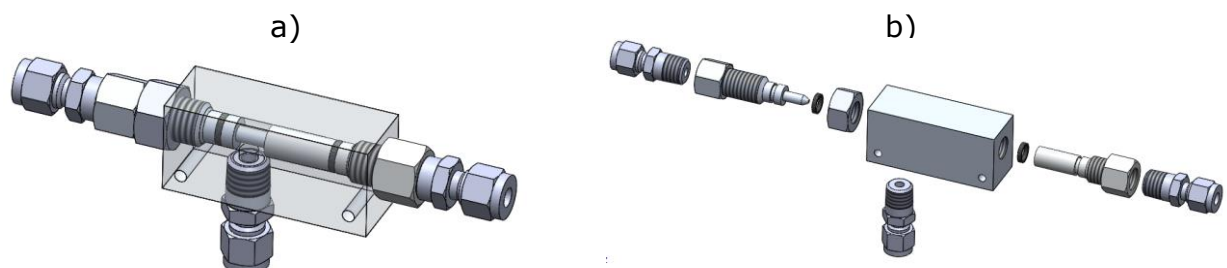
5- Initial solution. a)Ejector assembled. b)Exploded view.
